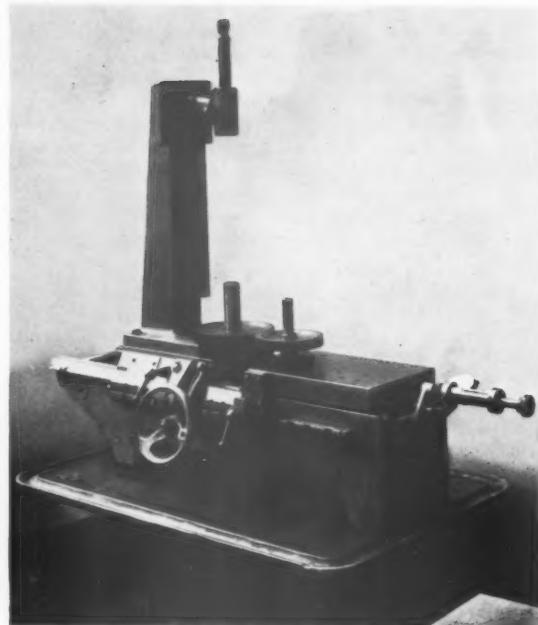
Testing fixture for inspecting spur and helical gears.
